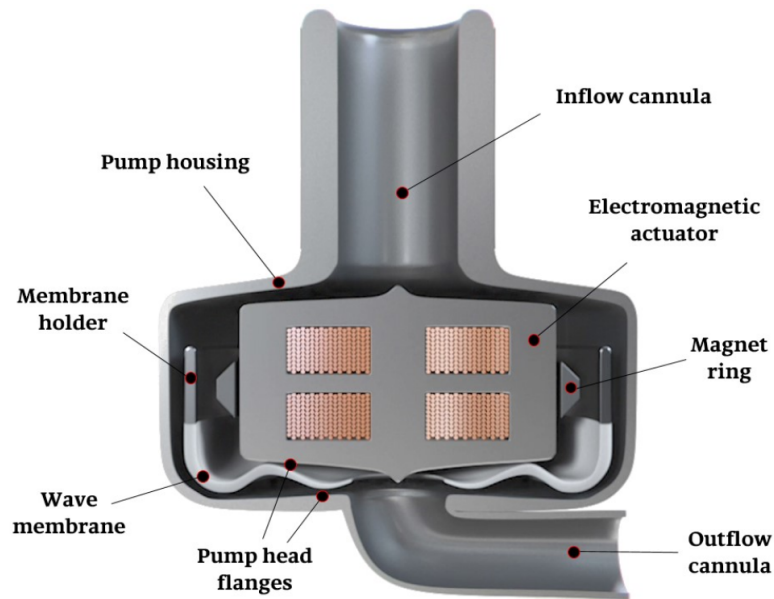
Cross-sectional view of the main components of the implantable WMBP, including inlet and outlet channel, the actuator assembly (stator, electromagnetic coils and magnet ring) and the membrane assembly (wave membrane and membrane holder).
